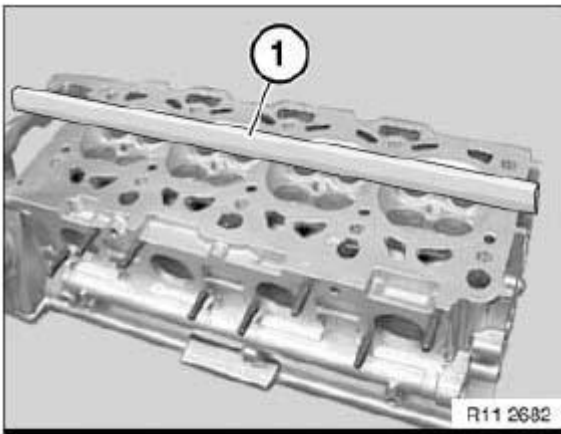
Checking Evenness Of Cylinder Head Sealing Face With Standard Straight-Edge
